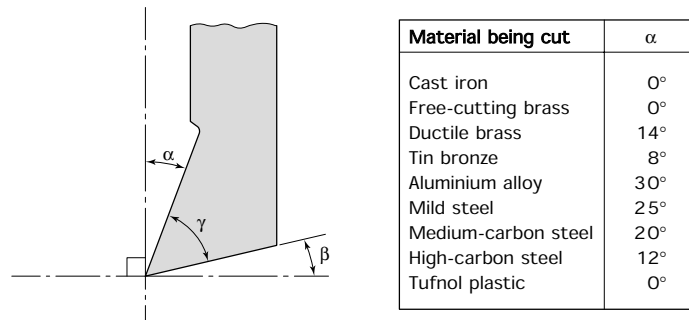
Cutting tool angles: α = rake angle; β = clearance angle; γ = wedge or tool angle
